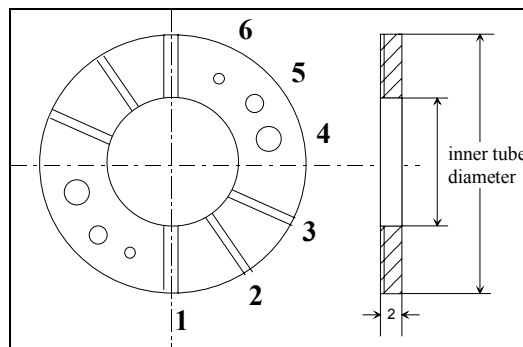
IQI for quality check of radiographs from tube to bottom welds in a heat exchanger bottom
